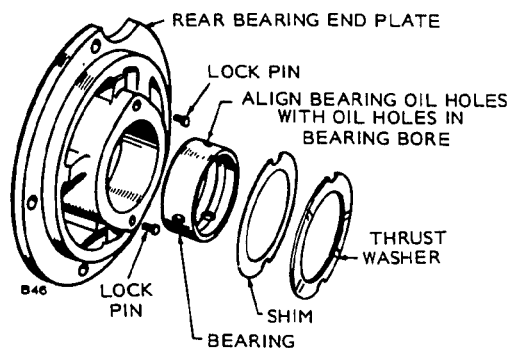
BEARINGS FOR REAR BEARING PLATE
